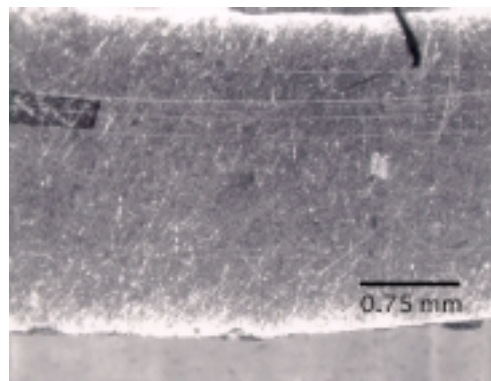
Section Part D5 – Shows end of foil where target tubes draw down around end of foil completely encapsulating the end of foil.
